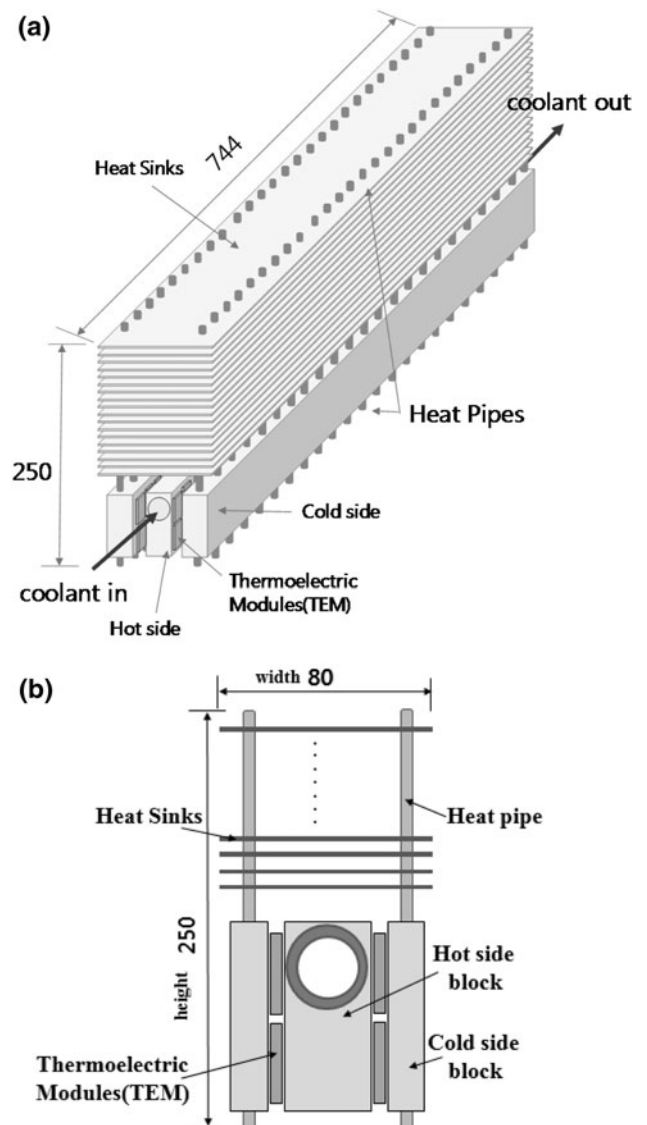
Perspective (a) and side view (b) of the proposed thermoelectric generator. Dimensions are in millimeters.
